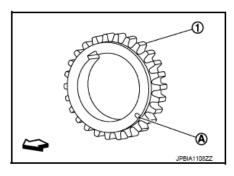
Identifying Matching Mark On Crankshaft Sprocket Courtesy of NISSAN MOTOR CO., U.S.A.
